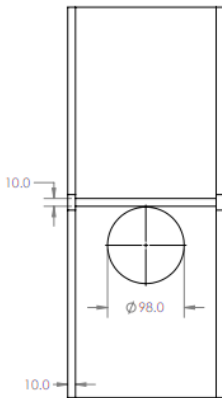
Top view of the motor as it is secured to the frame of Design 1, with dimensions in mm.
